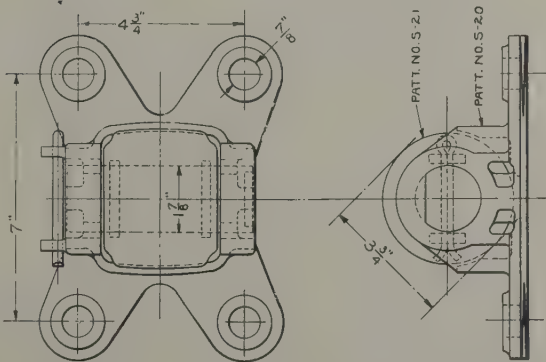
Stucki Side Bearing. A. Stucki Company.
